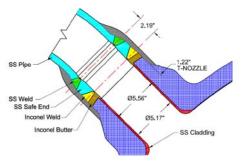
Concept of weld overlay repair on pressurizer nozzle
